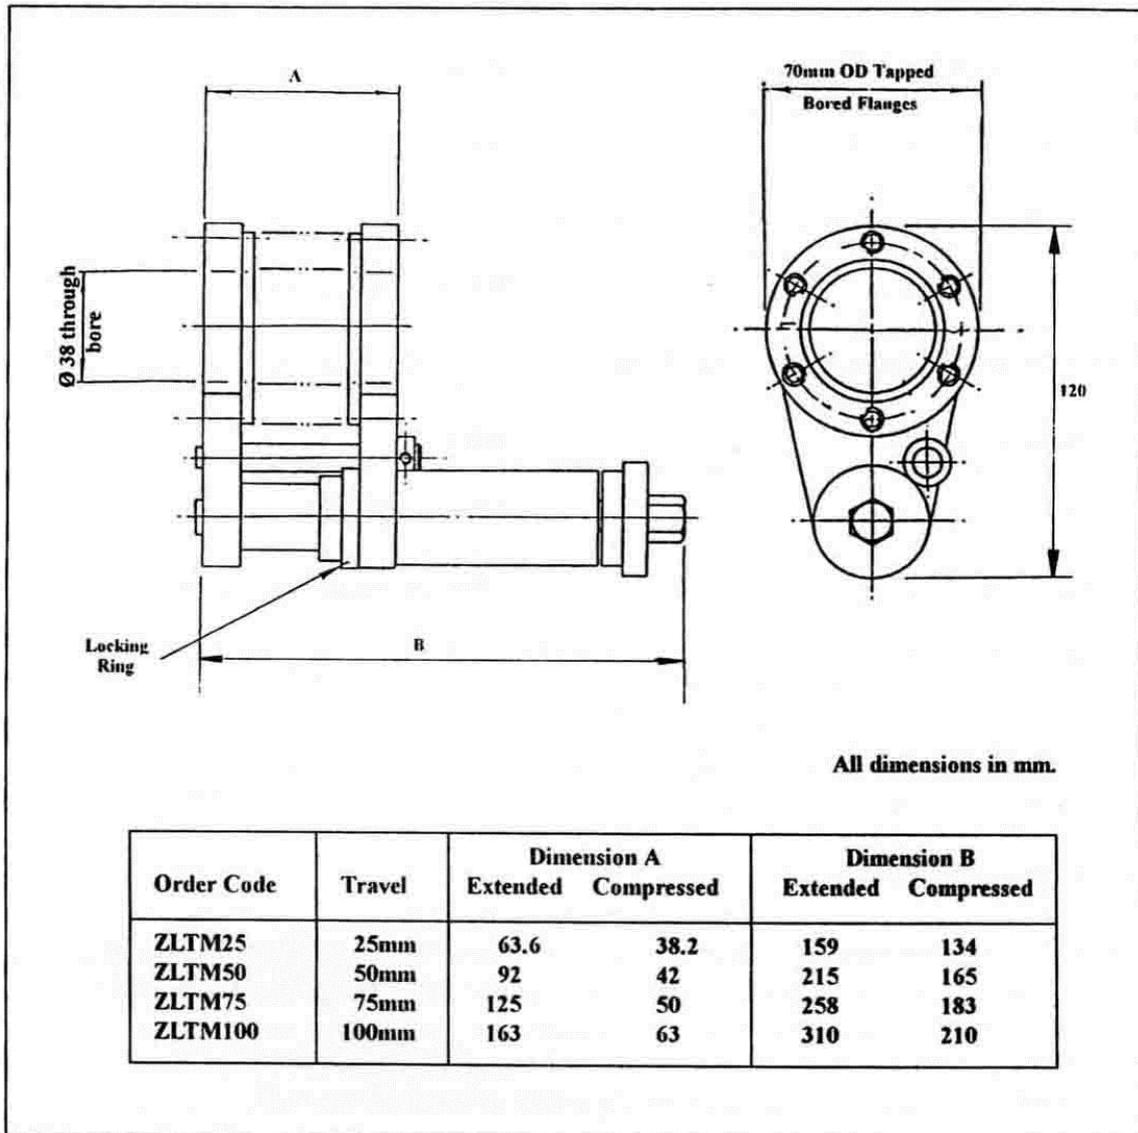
Dimensions of the LTM Series Linear Transfer Mechanism
